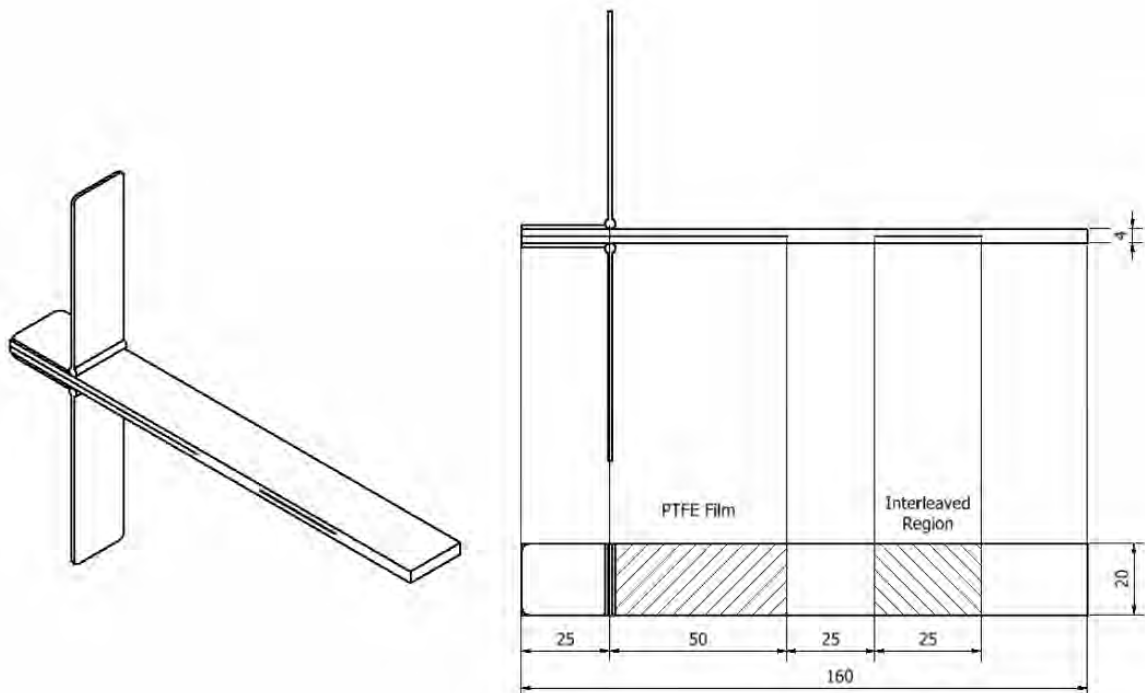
Geometric dimensions of the DCB specimens (all dimensions in mm).
